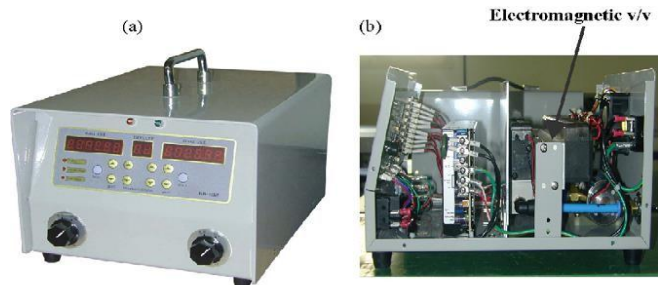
The apparatus for alternate supply of shielding gases: (a) outside view and (b) inside view.
